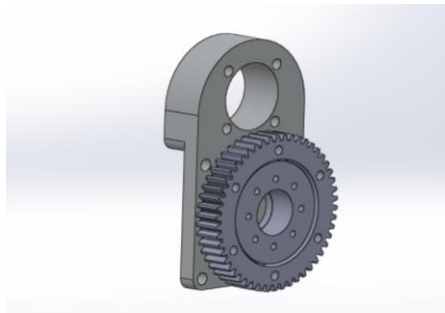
Shown is the base plate which integrates the rotational motor in the upper arm and the shoulder. The large gear is mounted to the base plate and the bearing allows the teeth to rotate freely.
